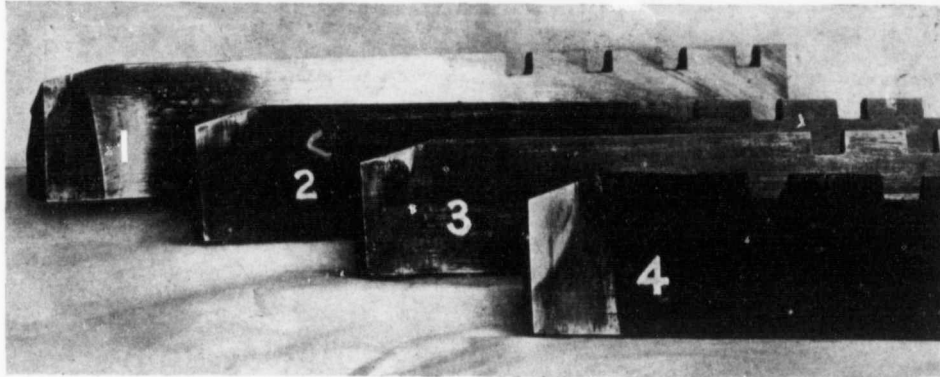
Reverse Side of Cutters Shown in Fig. 4. Illustrating the Rubbing Contact of the Tool Against the Shoulder of the Work. Each Tool Bears the Same Number in Both Cuts.
